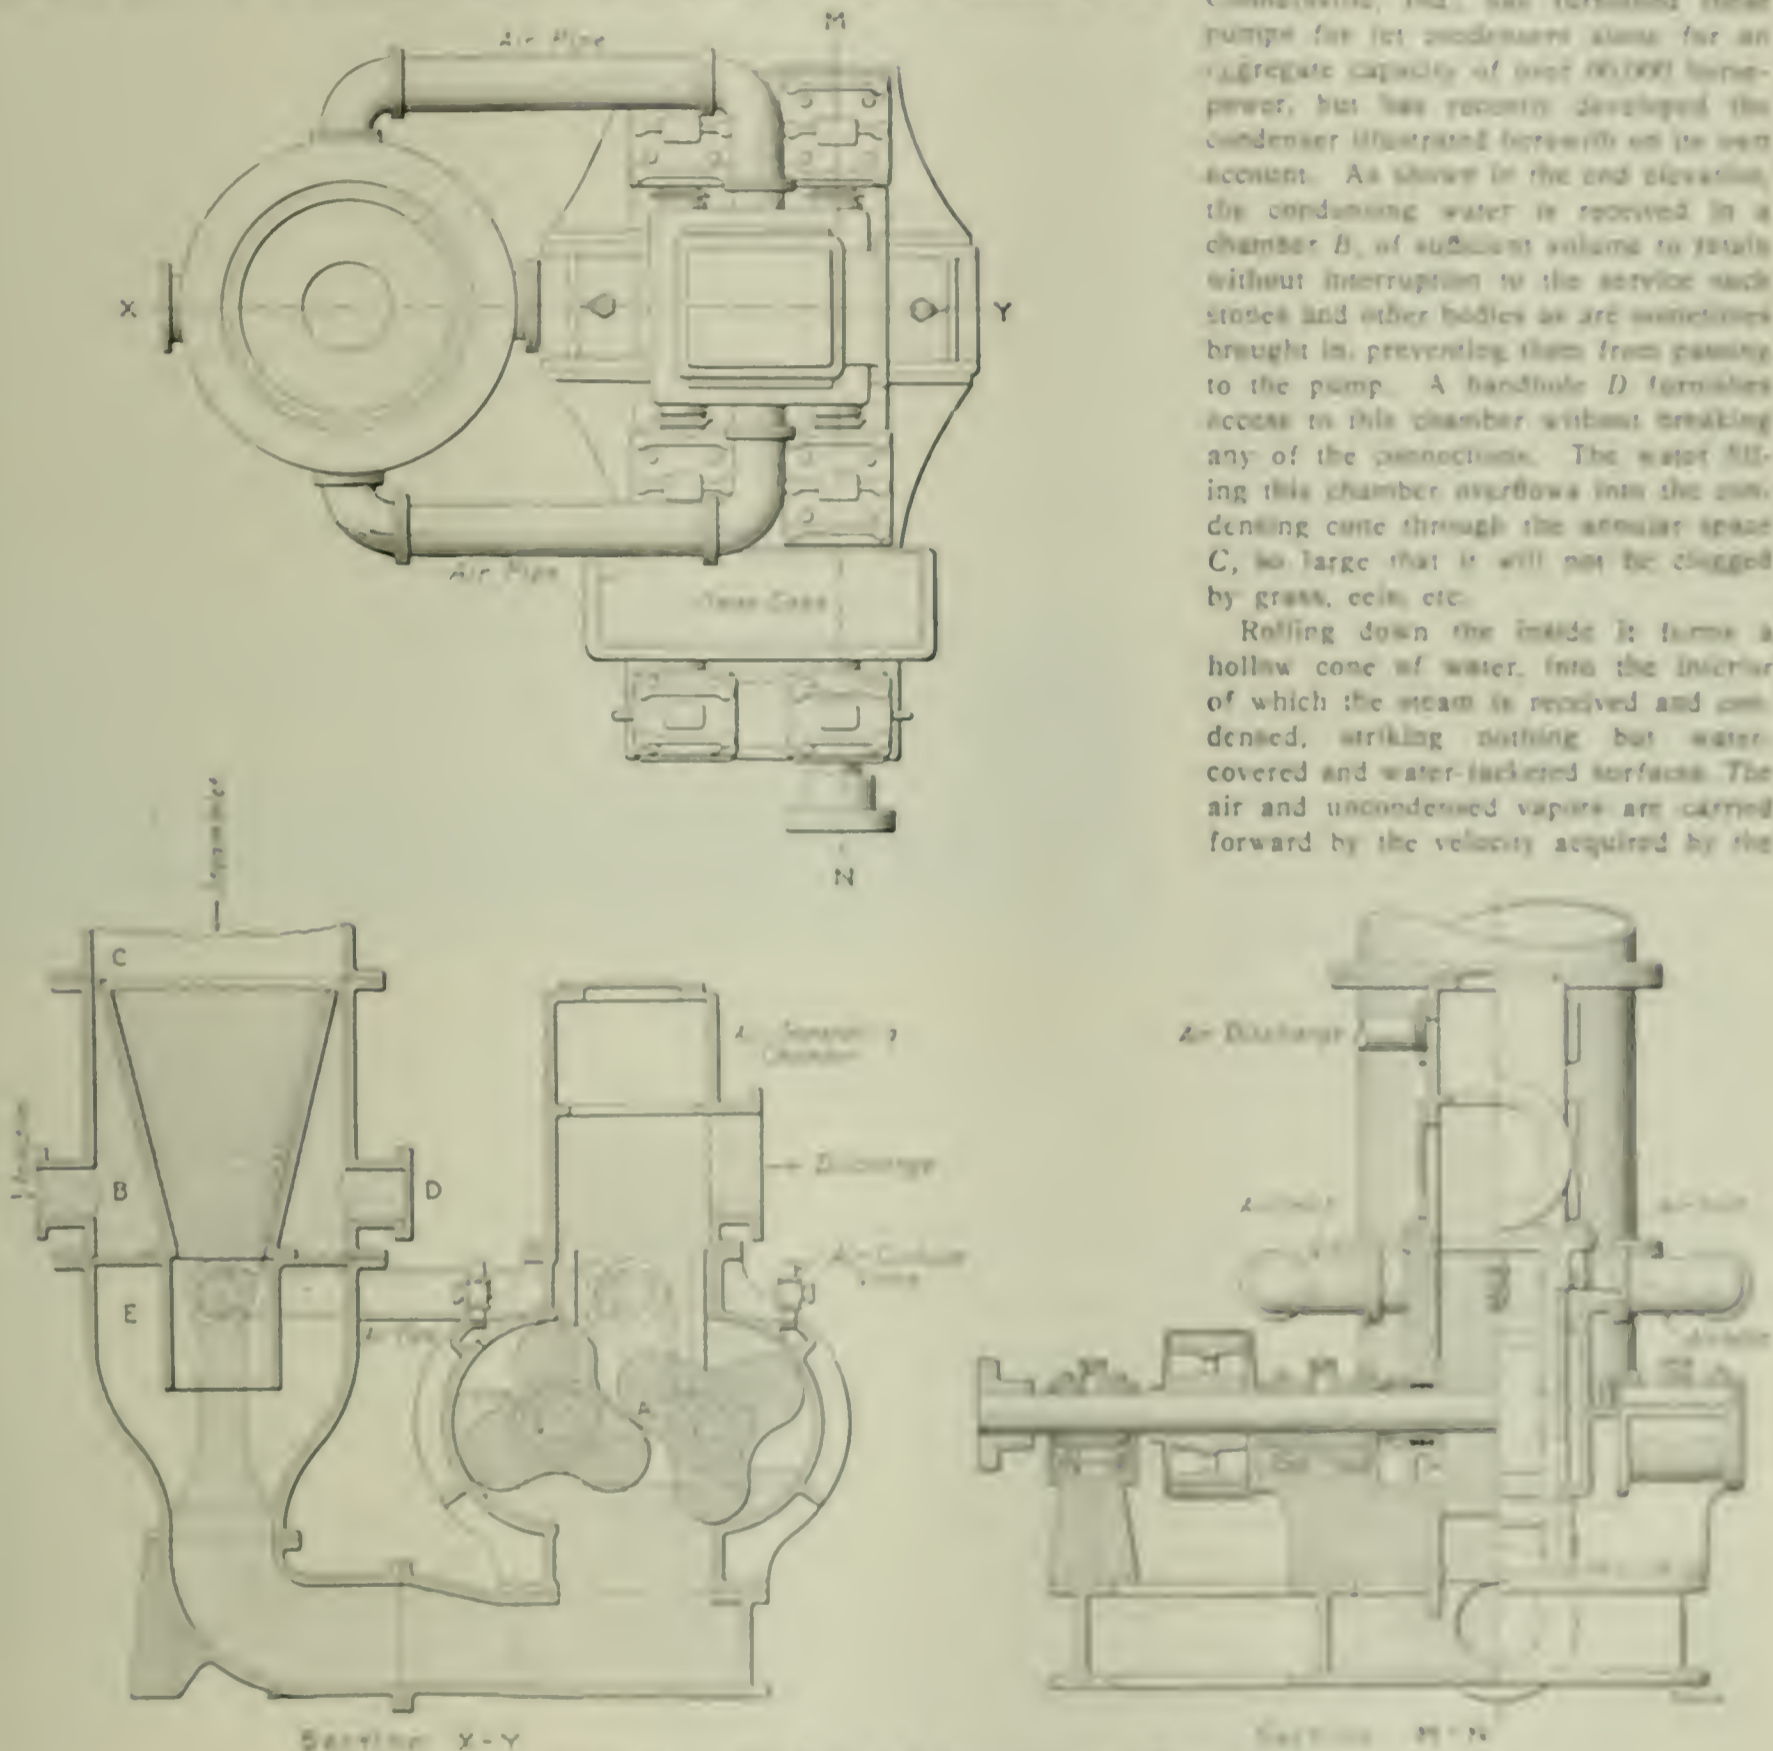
SECTIONAL VIEWS AND PLAN OF CONNERSVILLE PUMP AND CONDENSER
